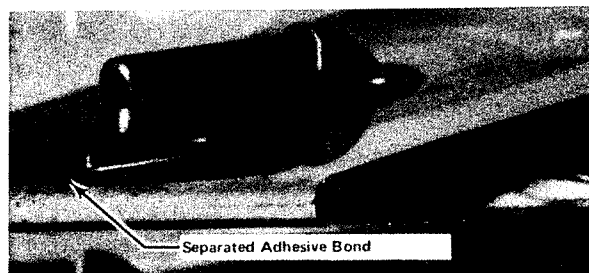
Silver conductive adhesive bond damaged after LTRI 100,000-ampere lightning test
